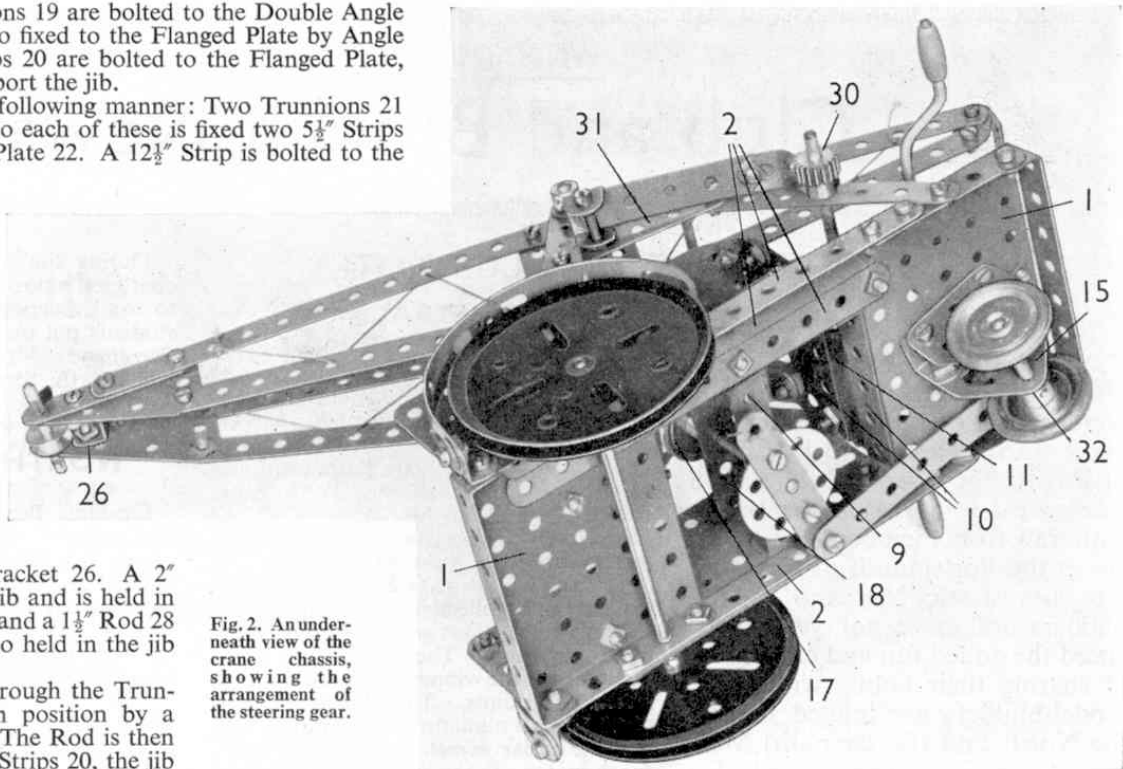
An underneath view of the crane chassis, showing the arrangement of the steering gear.
